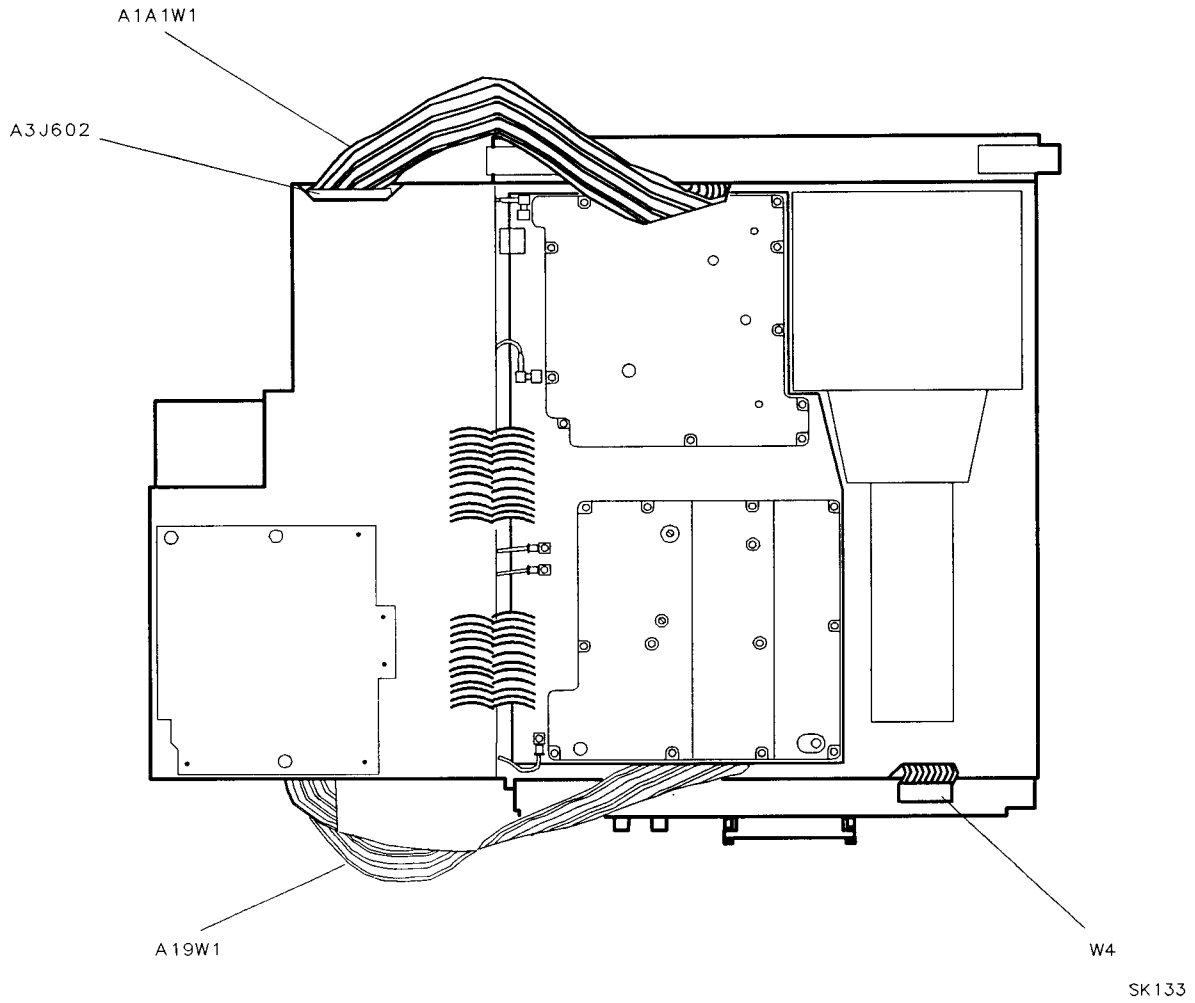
HP-IB and A1A1 W1 Cable Placement
